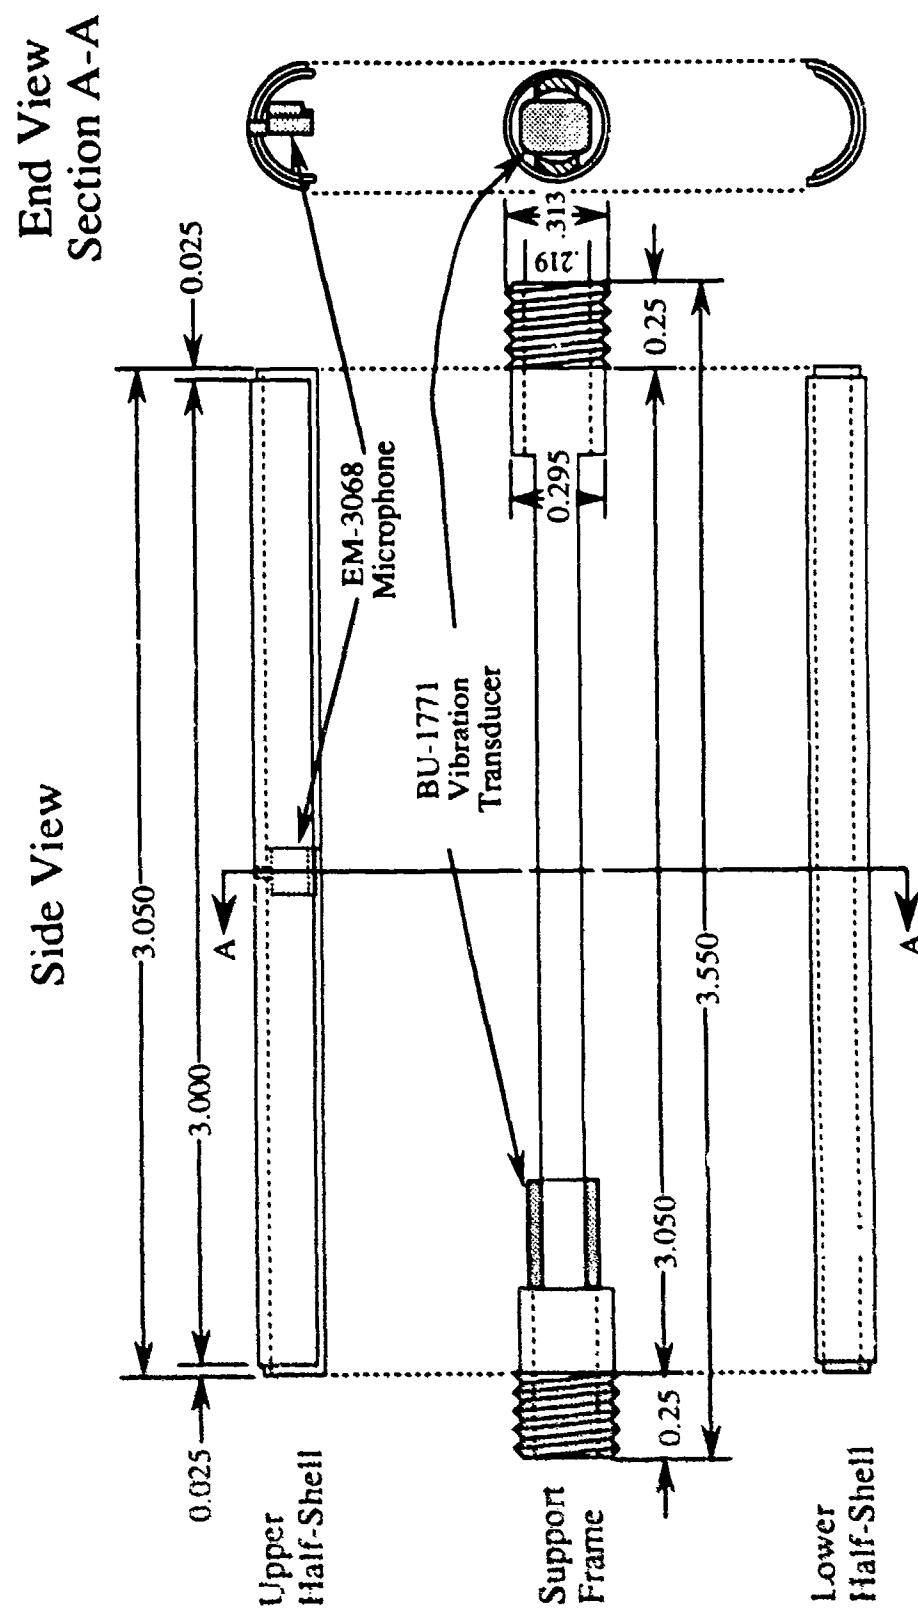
Exploded view of cylinder wall pressure instrumentation section (all dimensions in inches).
